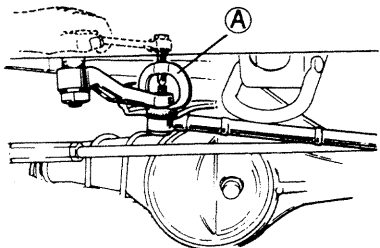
Ⓐ Special tool (Tie-rod end remover 09913-65210)
